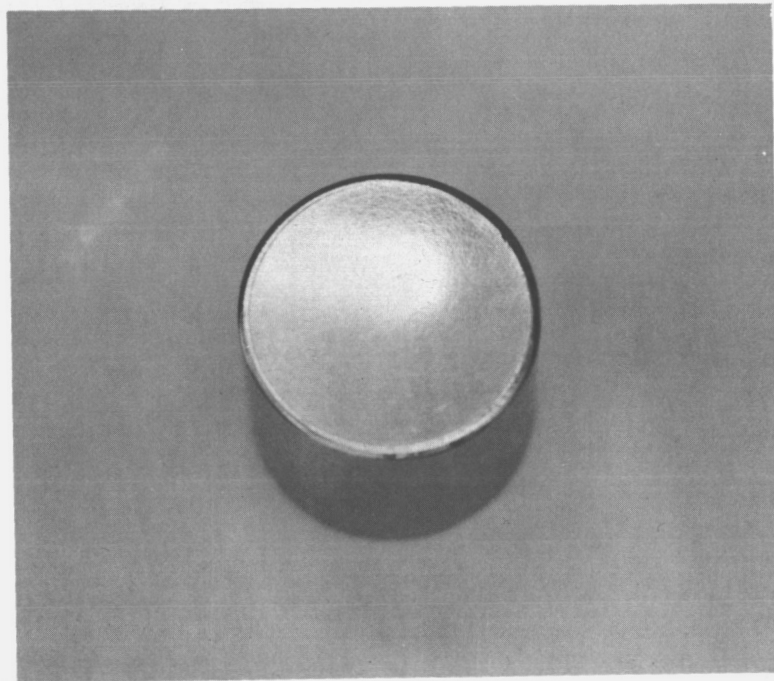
Top Weld of Test Container with Oxide after Cycling.
